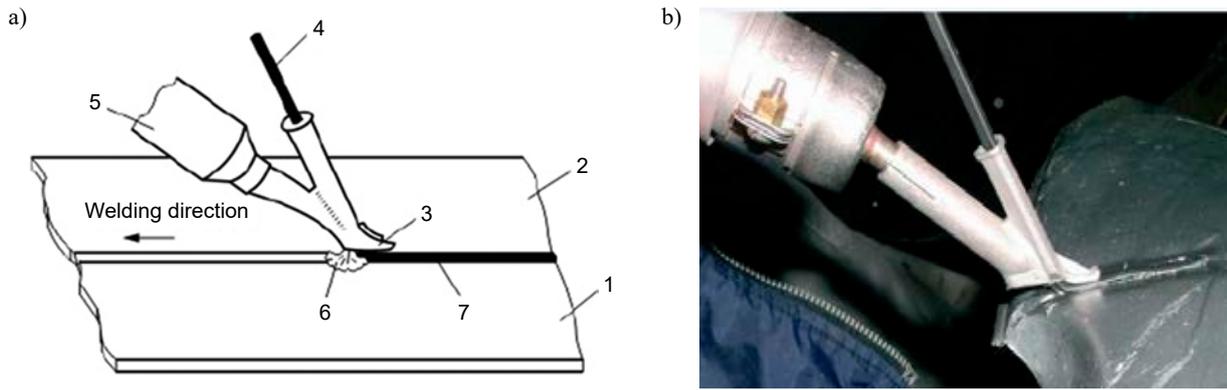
Welding of a thermoplastic using a joint and hot air; a) 1, 2 – welded material, 3 – welding foot, 4 – joint, 5 – heat source, 6 – hot air stream, 7 – ready joint (Klimpel, 2000); b) example of welding (Lepro, 2020)
